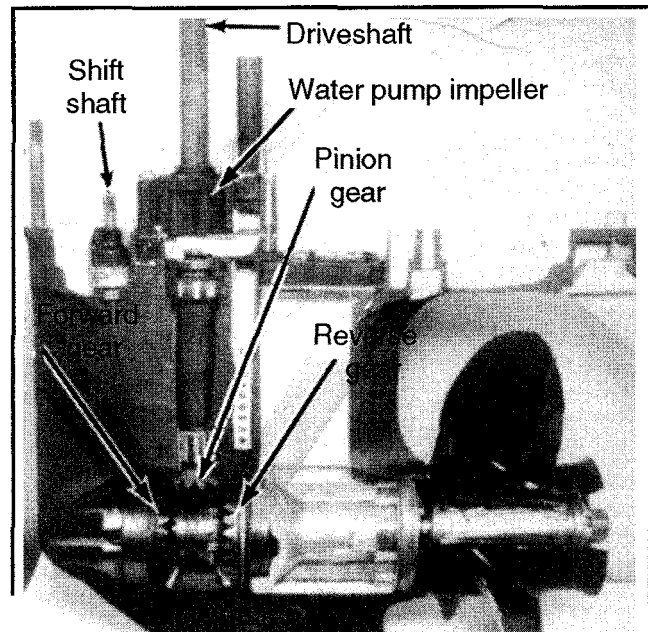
Classroom-type cutaway view of a lower unit with major parts, including the propeller and water pump, installed. Notice how the forward, reverse and pinion gears all are "bevel cut".
